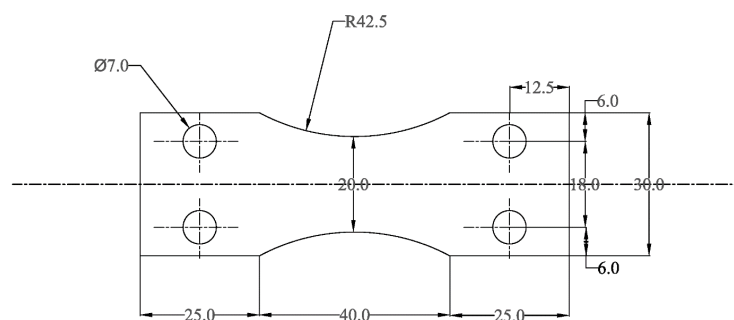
Fatigue specimen design with dimensions (in mm)
